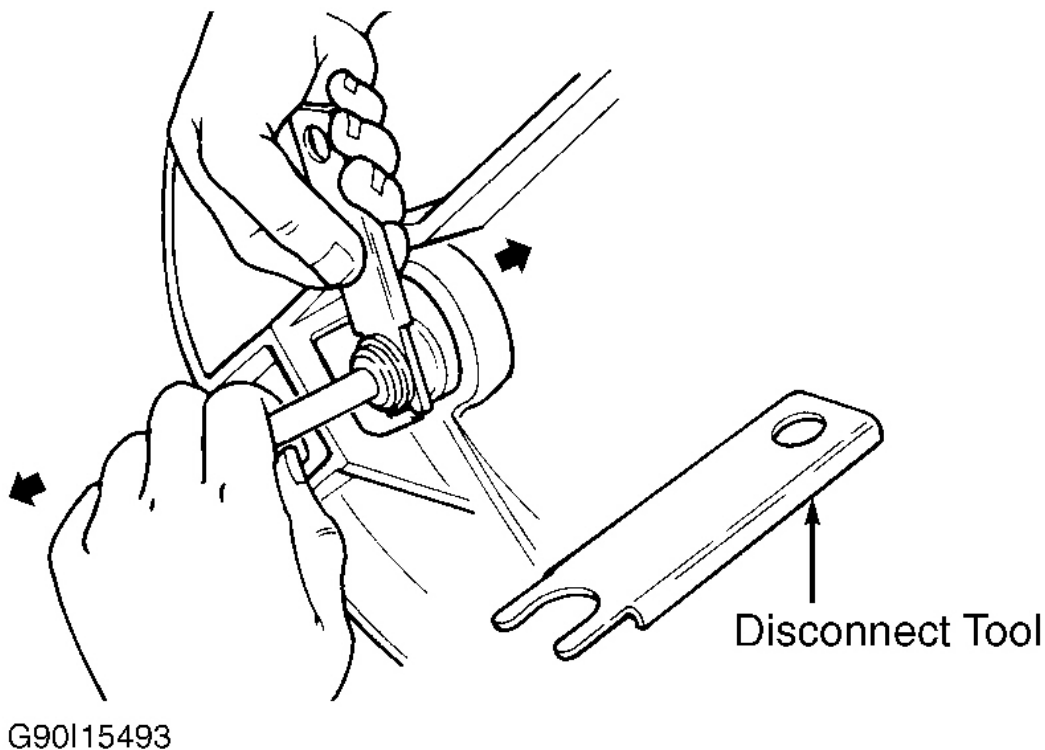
Clutch Hydraulic Line Removal (Except 7.3L Diesel)
